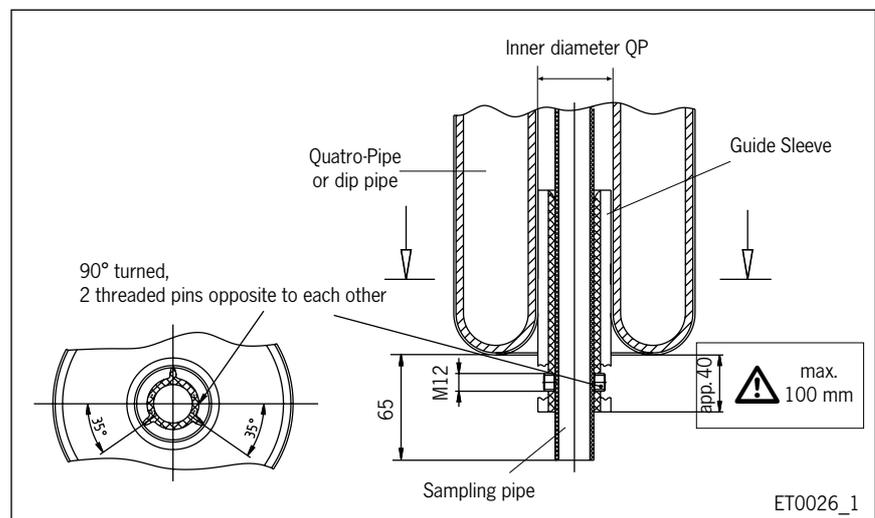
Detailed drawing of the bottom end of Quatro-Pipe.
